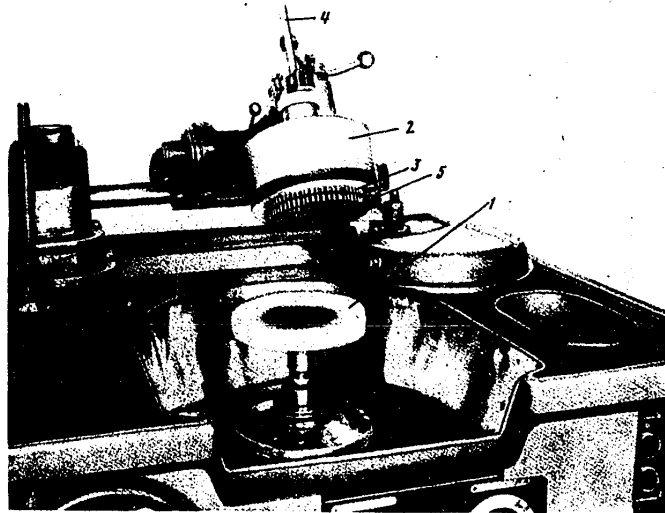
General view of a machine tool for machining parabolic surfaces. 1 -- billet, 2 -- tool housing, 3 -- working elements, 4 -- carrier, 5 -- working thrust bearings.
